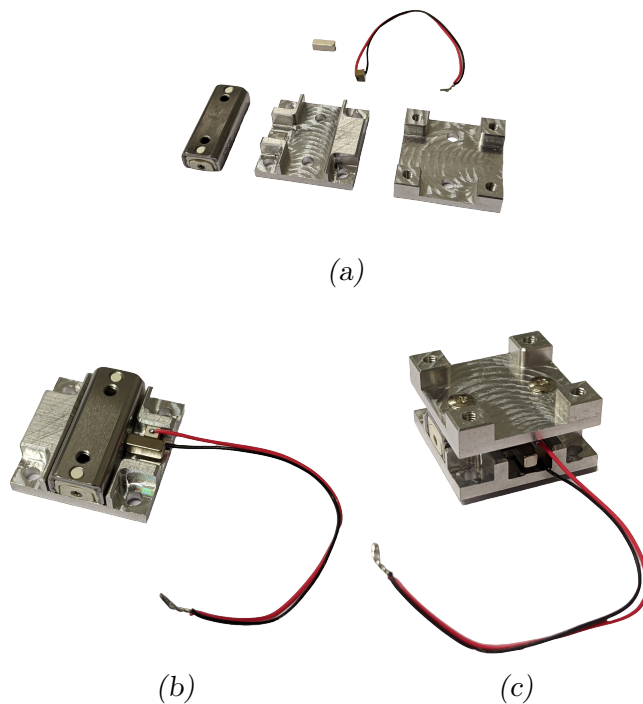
(a) The individual components of one stage of the nanopositioner, before assembly. (b) The partially assembled stage, with piezo stack and magnetic coupling installed (c) The fully assembled stage
